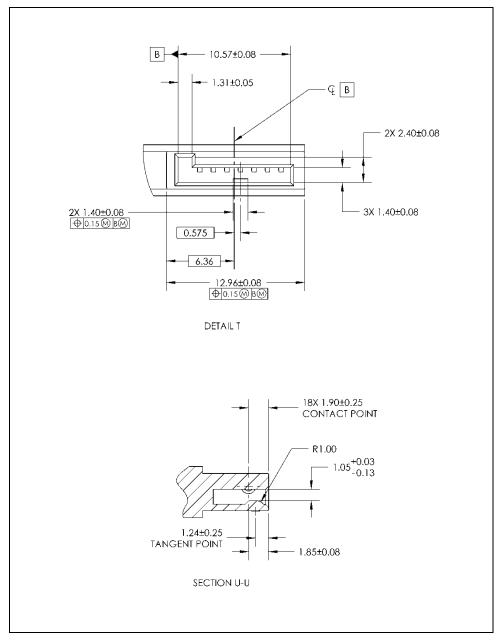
SATA Express host cable receptacle connector drawing (part 2 of 2)
